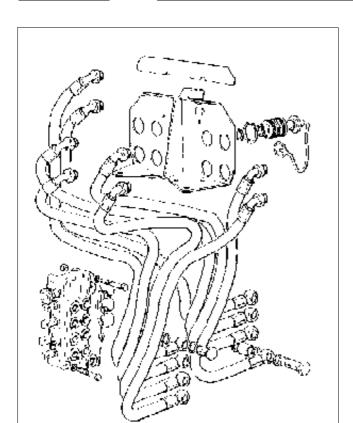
8-way auxiliary hydraulic spool valves.
